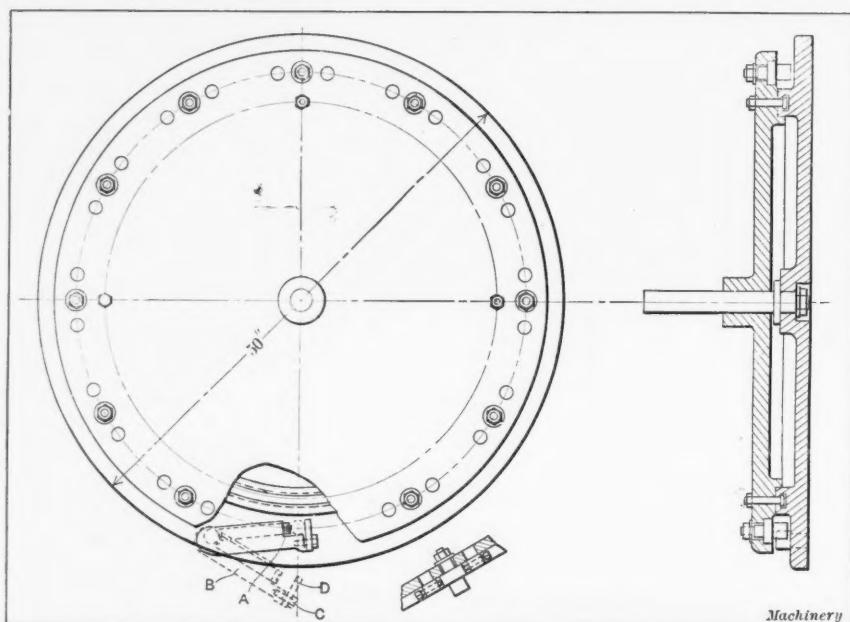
Design of the Planer Indexing Fixture used to plane the Turret and Turret Slide
